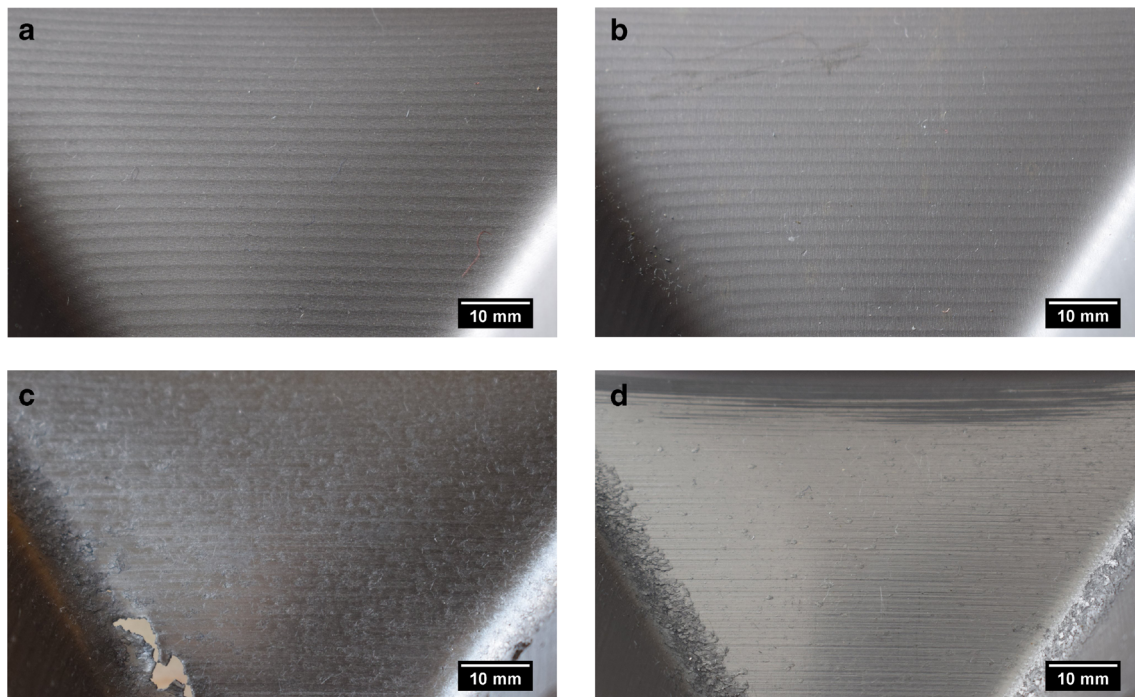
Worked surface for untreated sheet, sphere (a); heat-treated sheet, sphere (b); untreated sheet, hemispherical head tool unrotating (c); and heat-treated sheet, hemispherical head tool unrotating (d)
